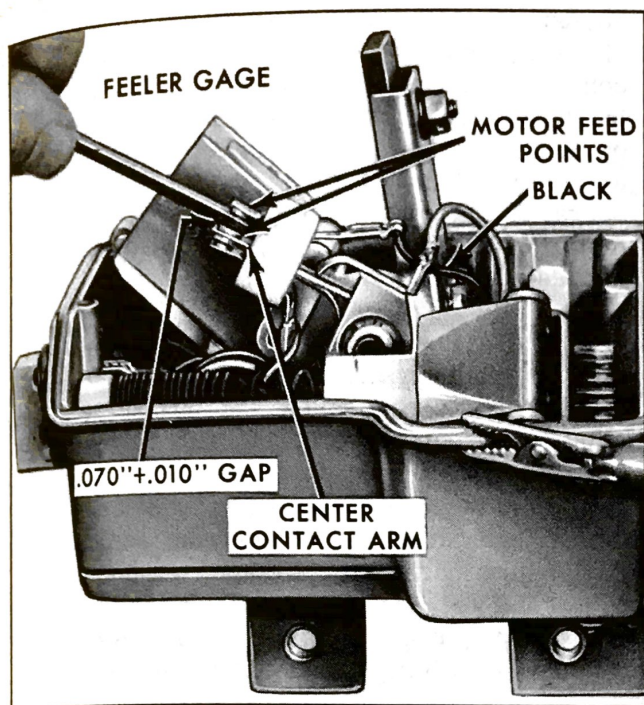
Motor Feed Points Adjustment (Full Gap)
